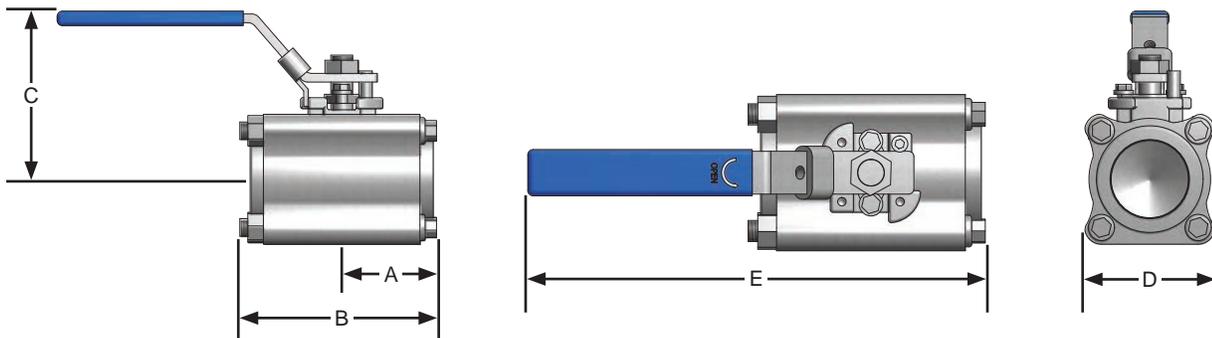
Manually Actuated Ball Valve Dimensions
